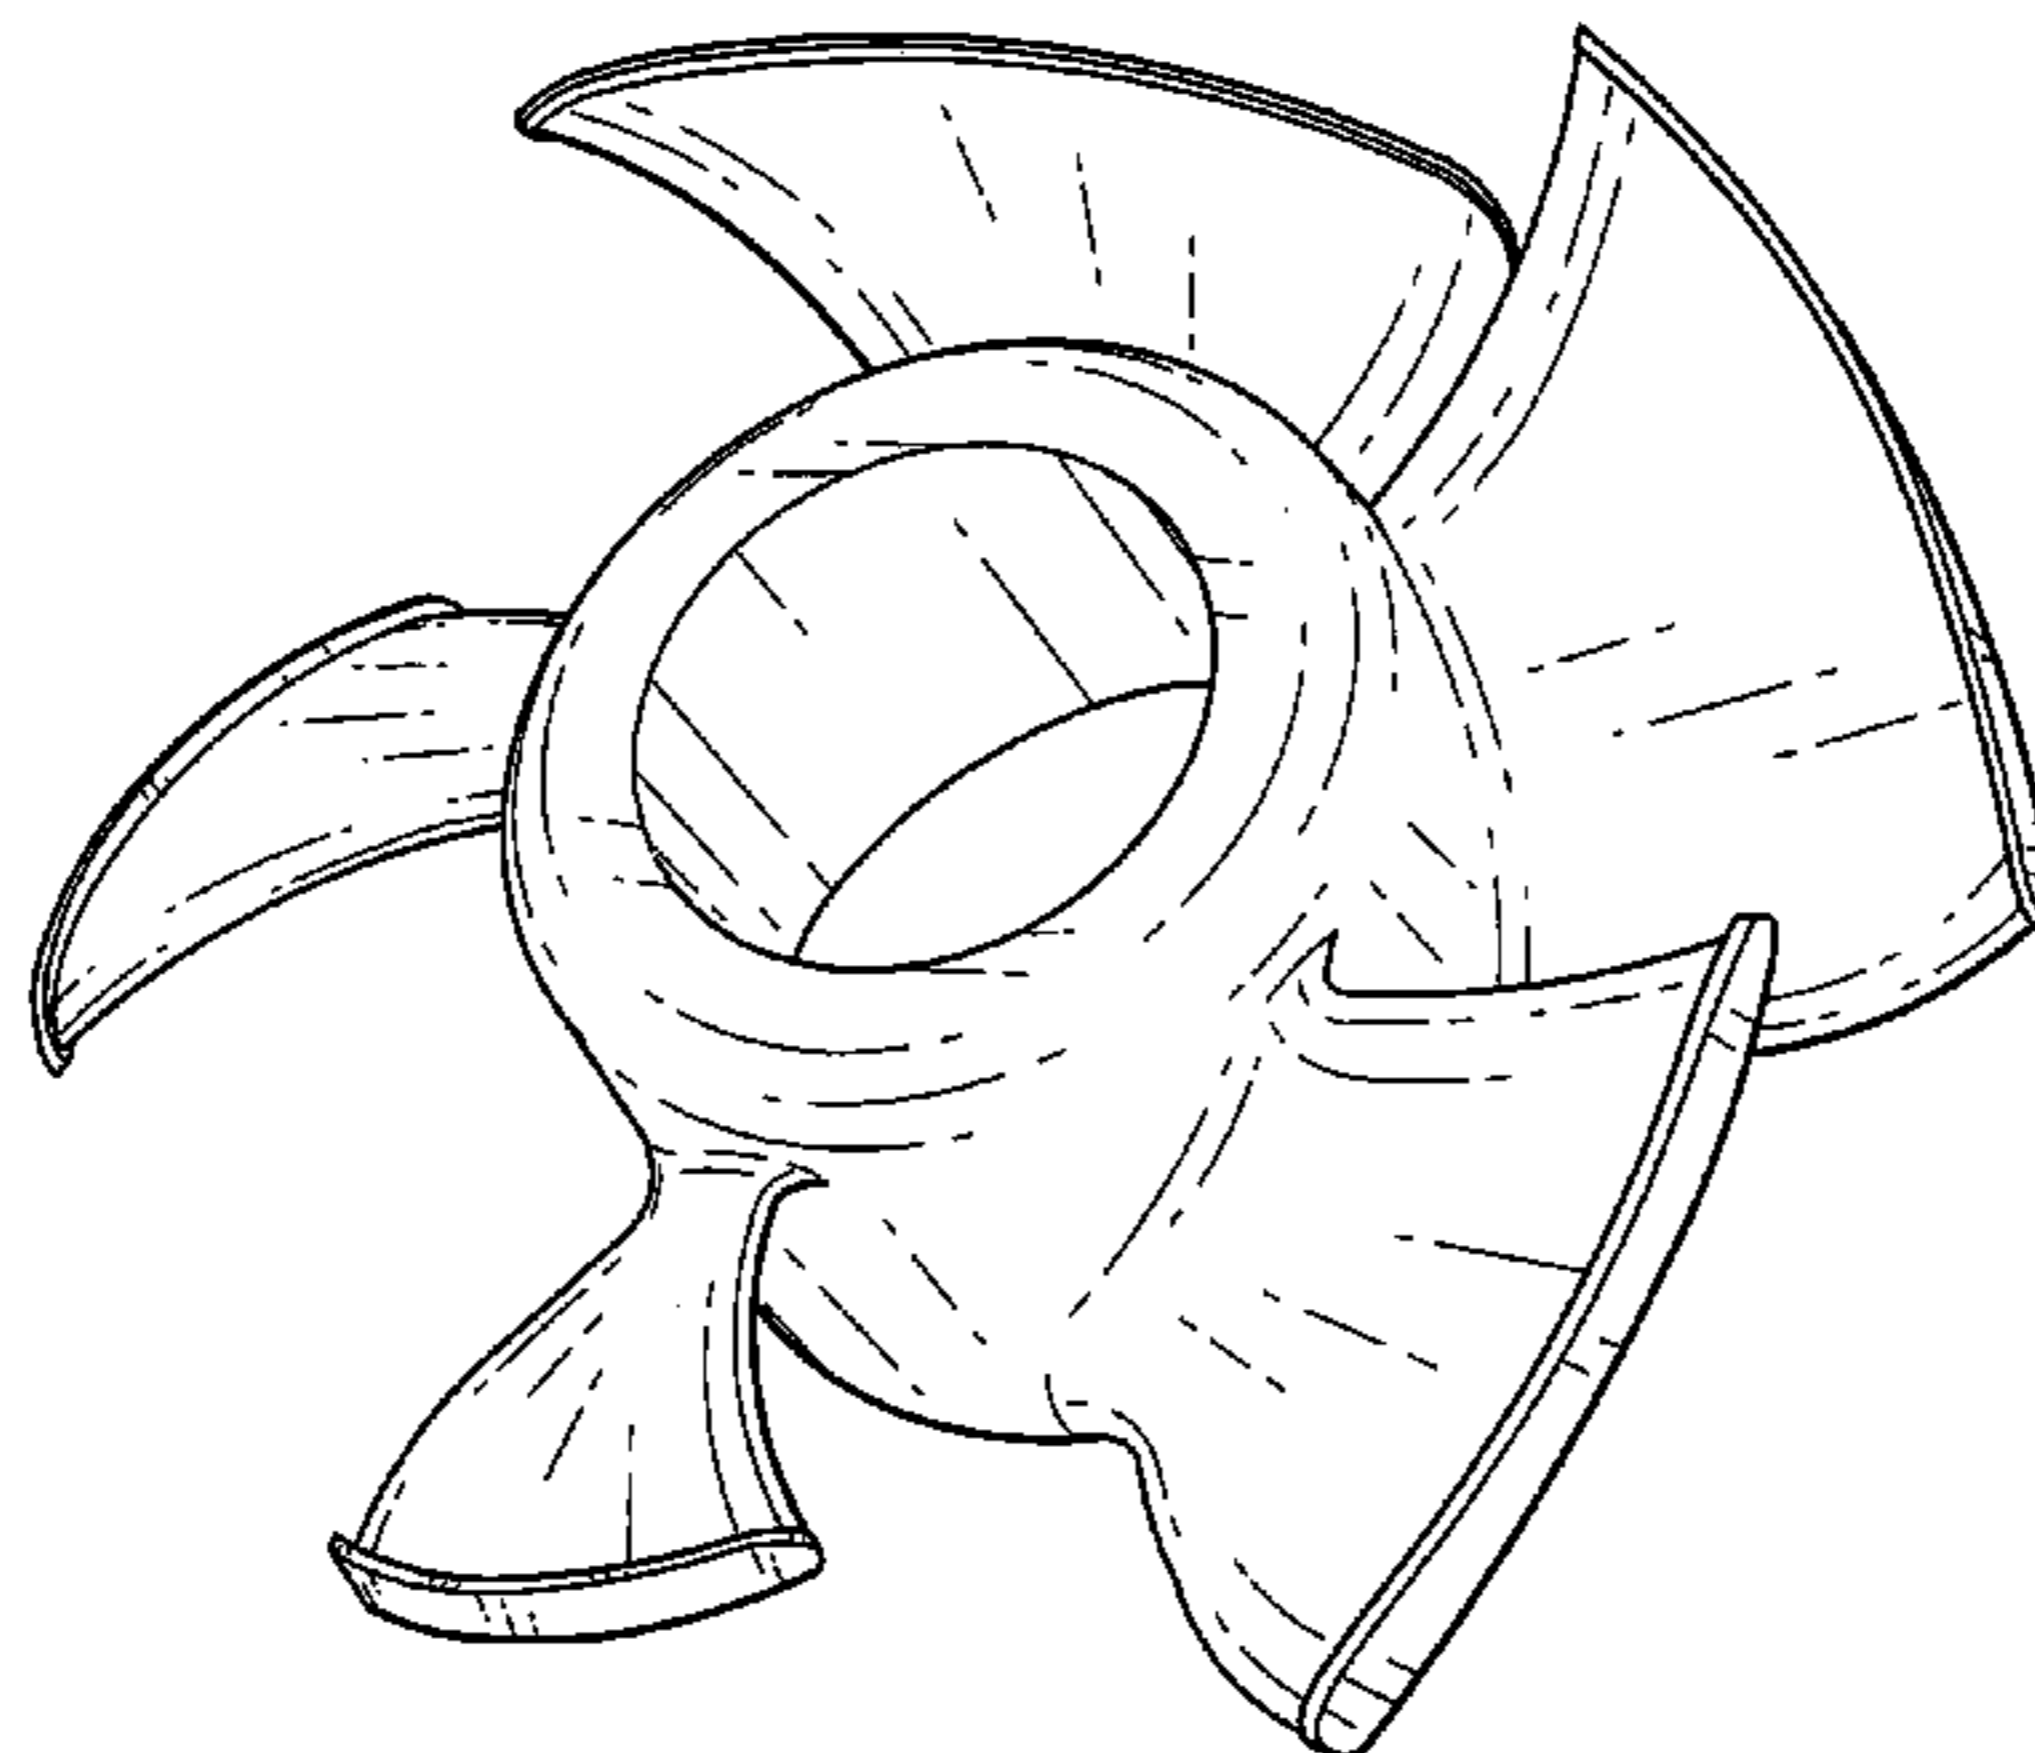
is a perspective view of the rotor, showing top and side views of the new design;
